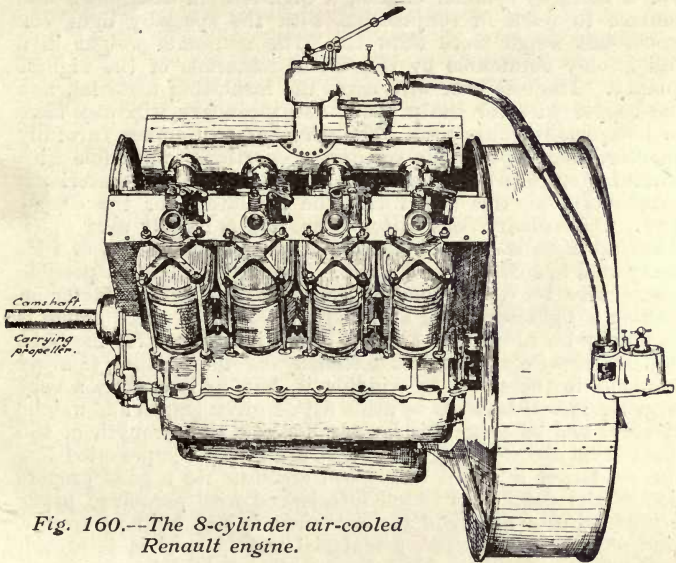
The 8-cylinder air-cooled Renault engine.
